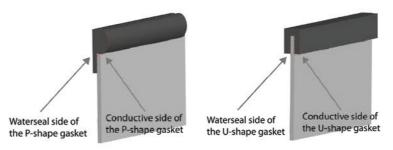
Example of a p-shape gasket and a u-shape gasket
